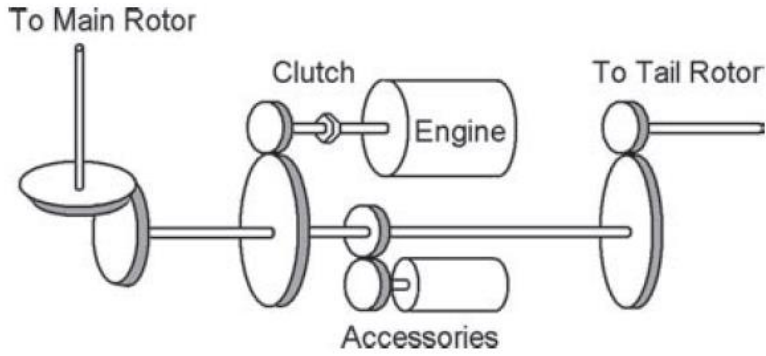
Main Rotor and Engine Drive Train[4]
